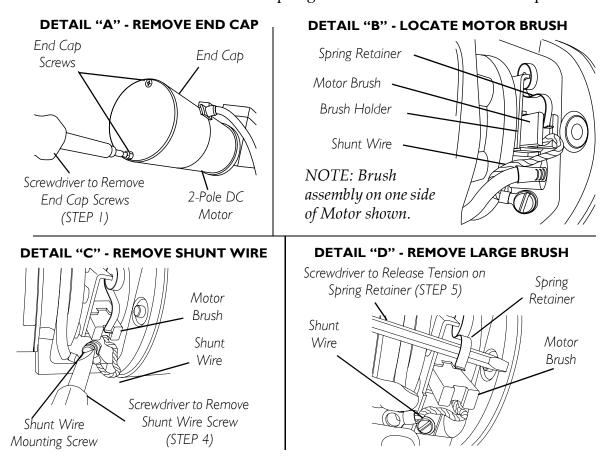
MOTOR BRUSH INSPECTION AND/OR REPLACEMENT 2 POLE MOTOR
